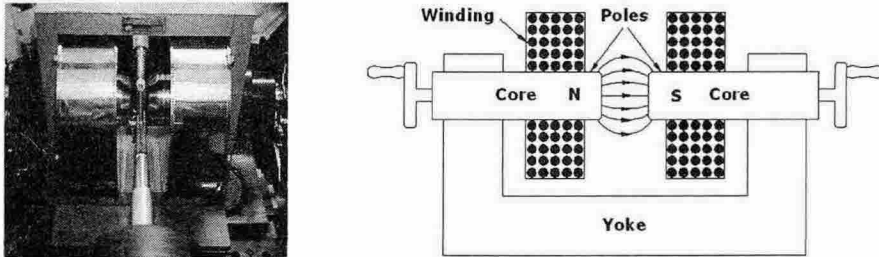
Photographs of experimental equipments for magnetic abrasive grinding
